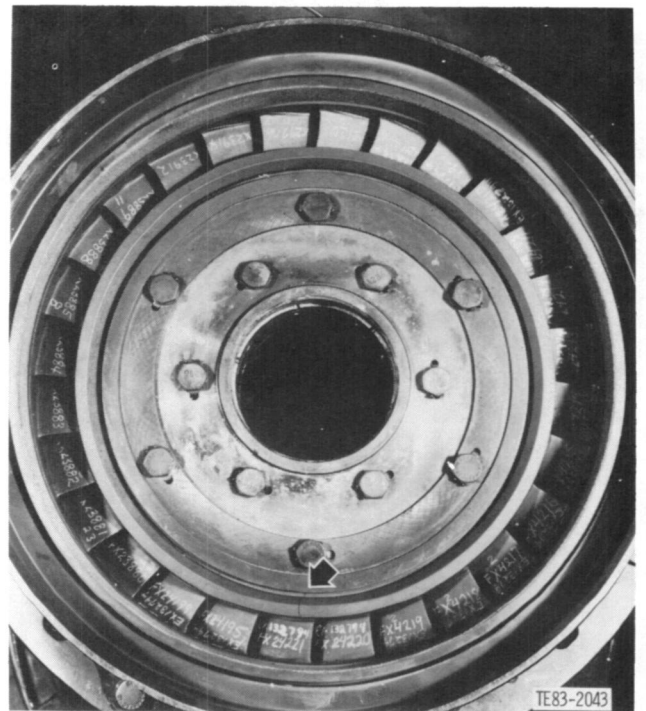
View of gasifier nozzle assembly from rear, showing crack in inner vane support ring after testing in thermal shock rig (BU12).
